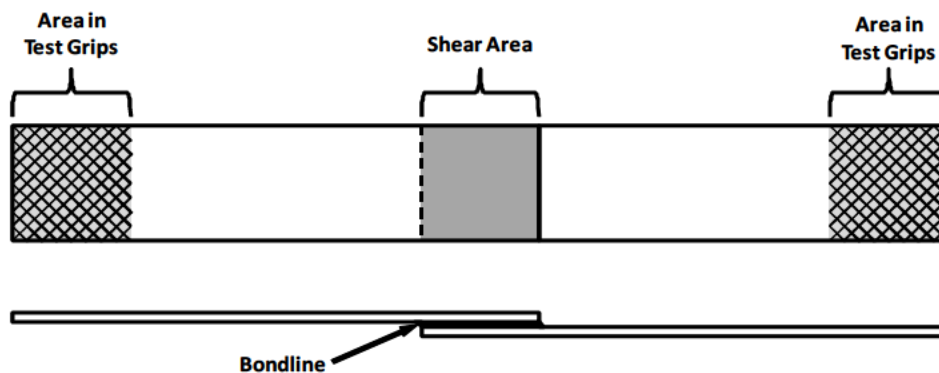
Illustration of the adhesively bonded single-lap-joint test specimen configuration (refer to ASTM D1002 for dimensions).
